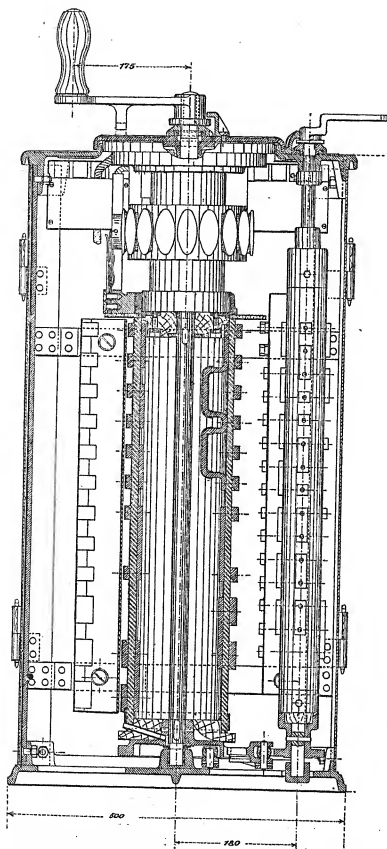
Elevation of Siemens-Schuckert "N" Tramway Controller.
